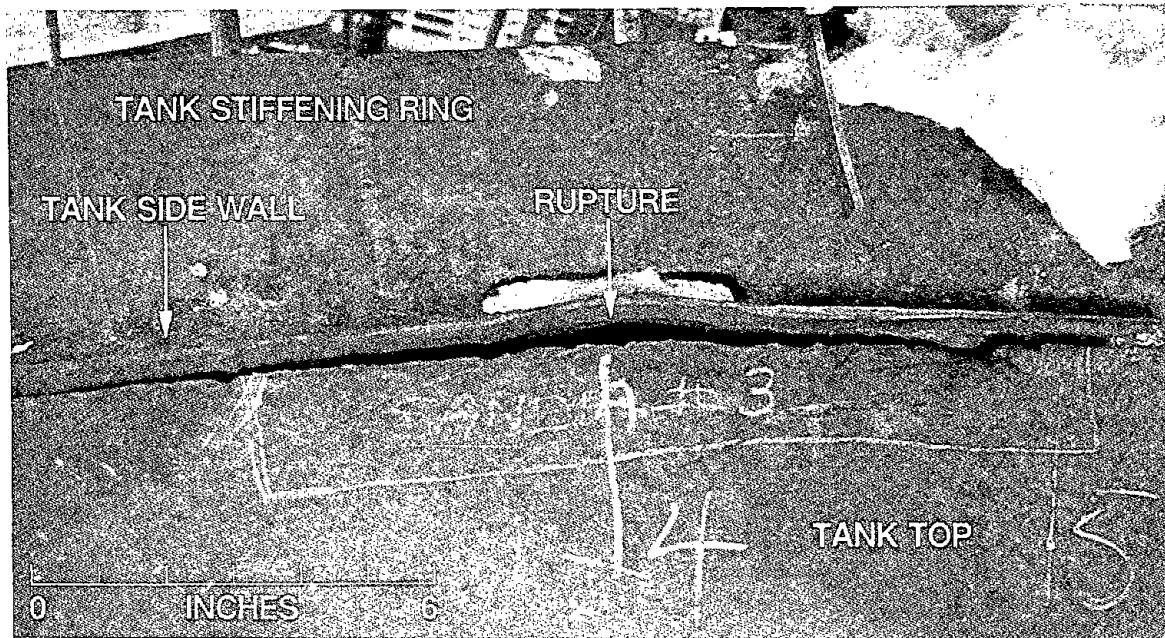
Thermal Storage Tank Wall/Roof Rupture Looking Down on the Roof
